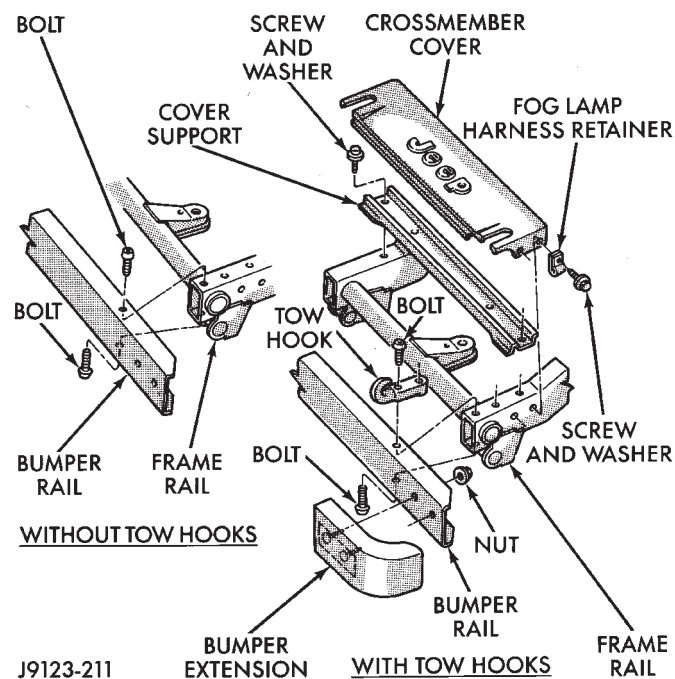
Front Bumper Rail, Crossmember Cover & Tow Hooks
